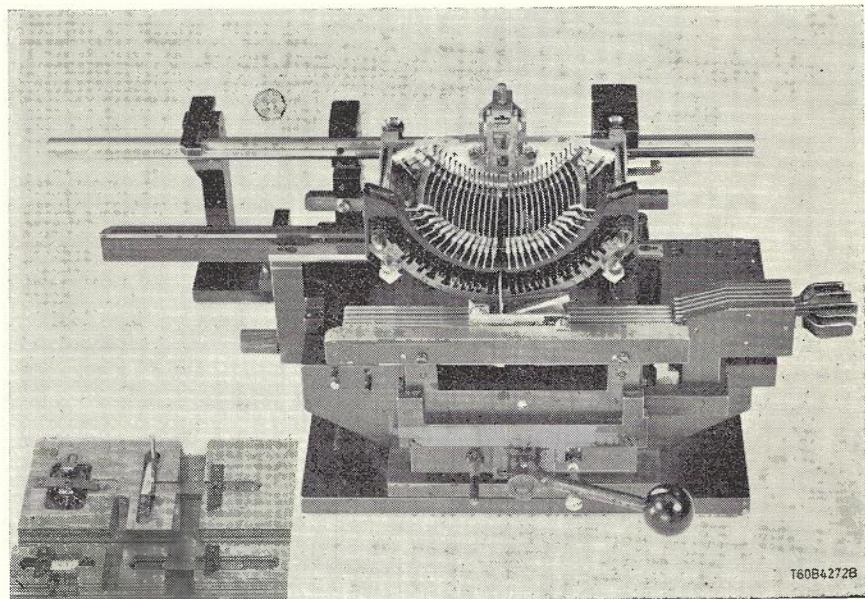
Adjustment of Type Basket (test piece) to Code Bars. (fixture) of Printer Base. On the left: Adjusting Gauges.
